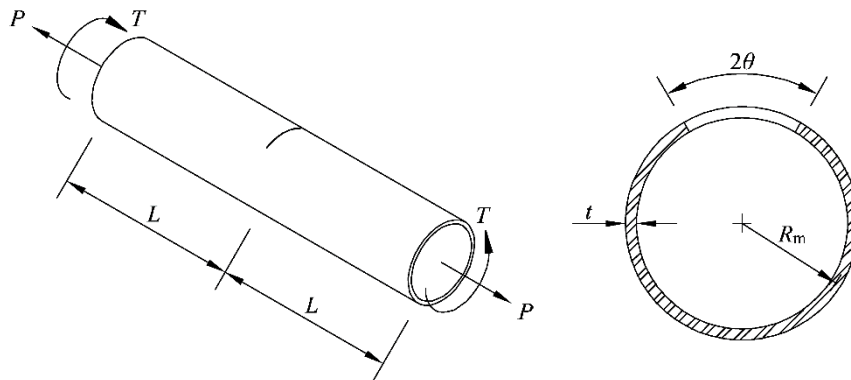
Circumferential through-wall crack in a cylindrical shell subjected to tension P and torque T
